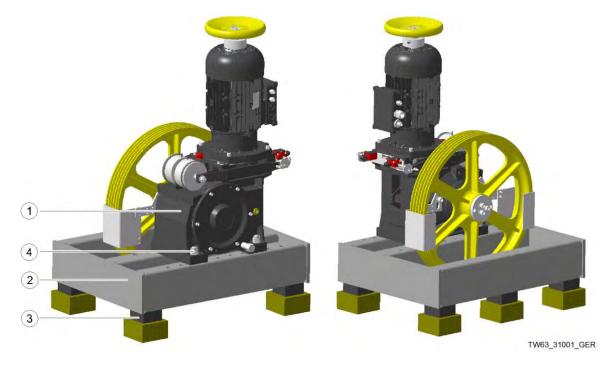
Machine base frame TW63 NO/2:1 (shown with TW63B machine in vertical motor position)
